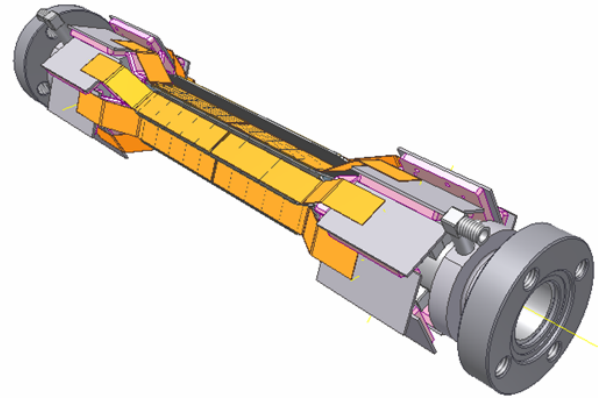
Schematic drawing of the full Layer0 made of 8 pixel modules mounted around the beam pipe with a pinwheel arrangement.
